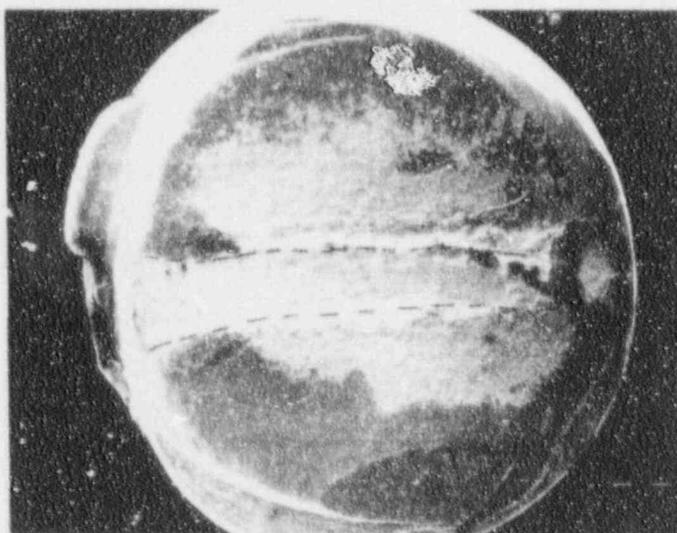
View of the fracture surface of vertical bolt number 8, illustrating rubbing damage and reverse bending fatigue conditions. The location of the overload zone is in the center of the fracture face which is indicative of even reverse loading of bolt.
